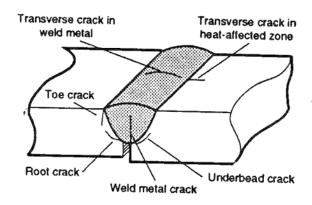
Cold cracks in carbon steel welded joint (Davis, 1996)
